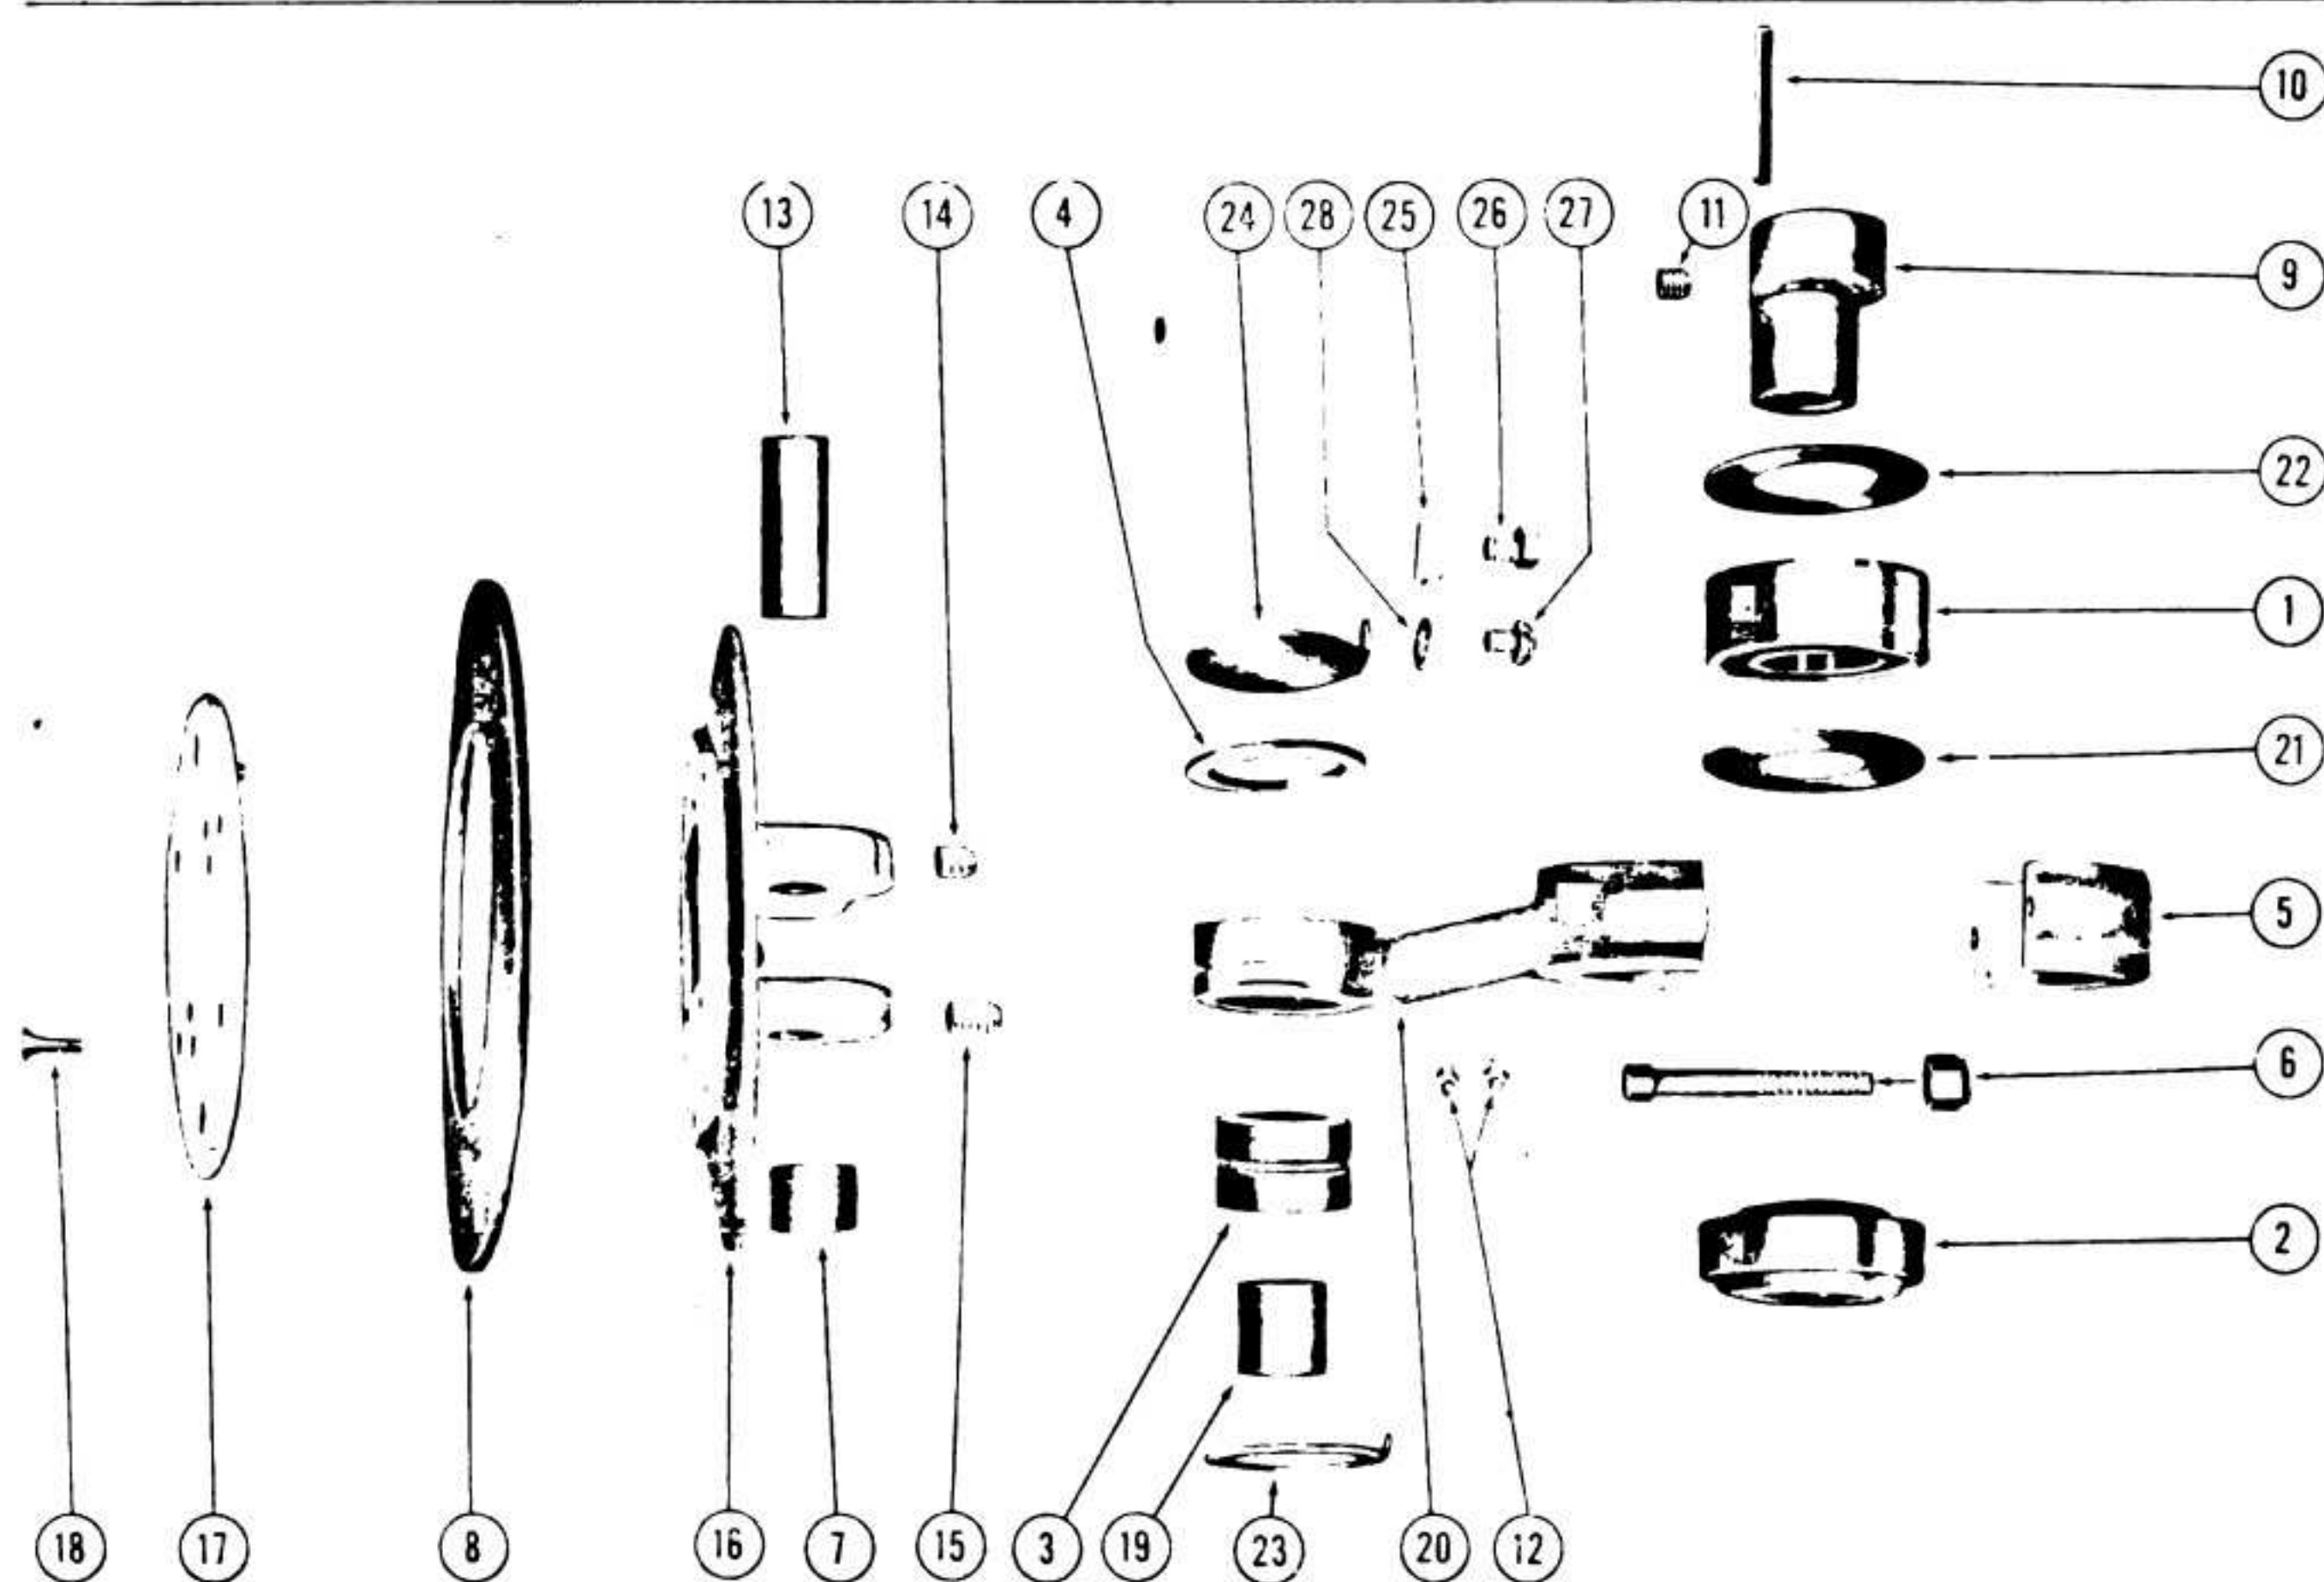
Exploded View of Compressor Piston and Diaphragm Assembly
